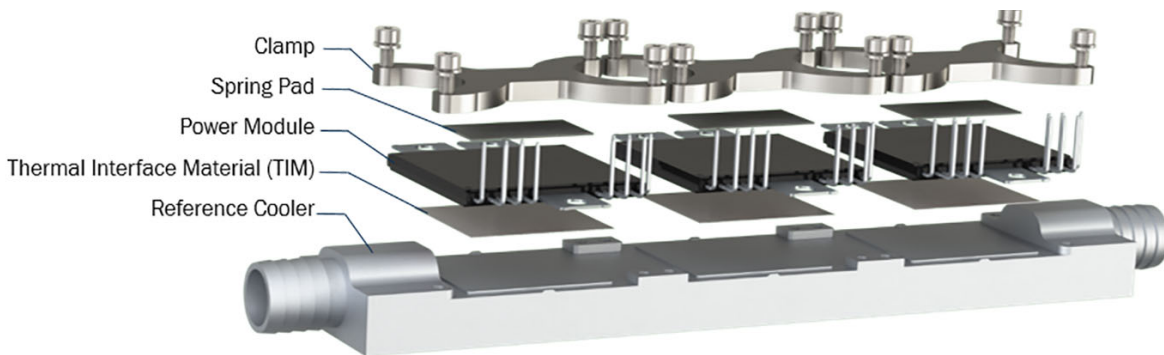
Exploded View of the Cooler Stack for the VE-Trac B2 SiC
